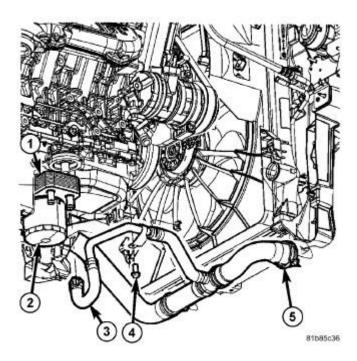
Engine Oil Cooler, Filter, Coolant Hose, Bolt & Lower Radiator Hose Courtesy of CHRYSLER LLC
